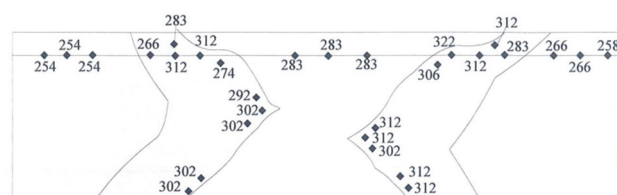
Scheme of hardness testing after PWHT - sheet #14 mm
